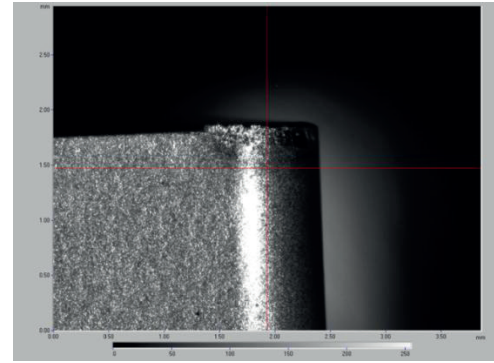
Cutting insert CNMG-120408-MP after machining
